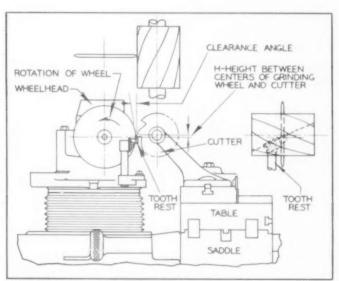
Grinding the clearance angle on profile type milling cutters with a disc type wheel.
